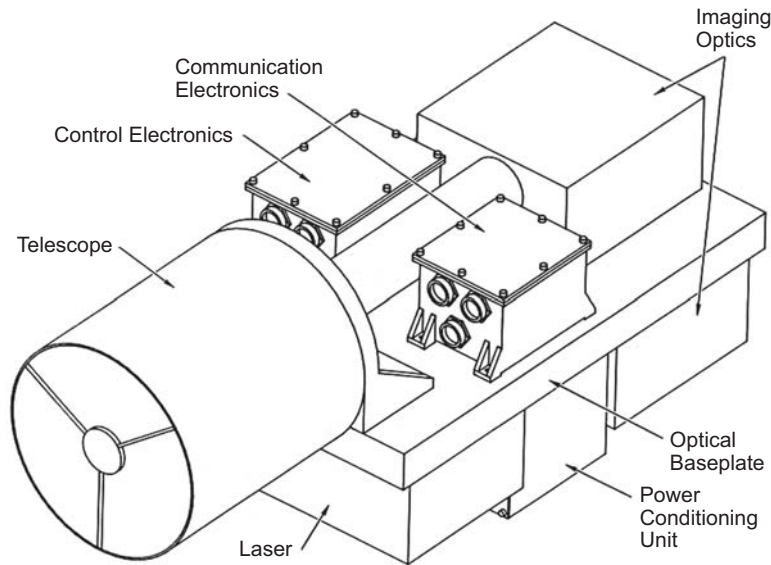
Isometric drawing of the OPTRANSPAC flight terminal design.
